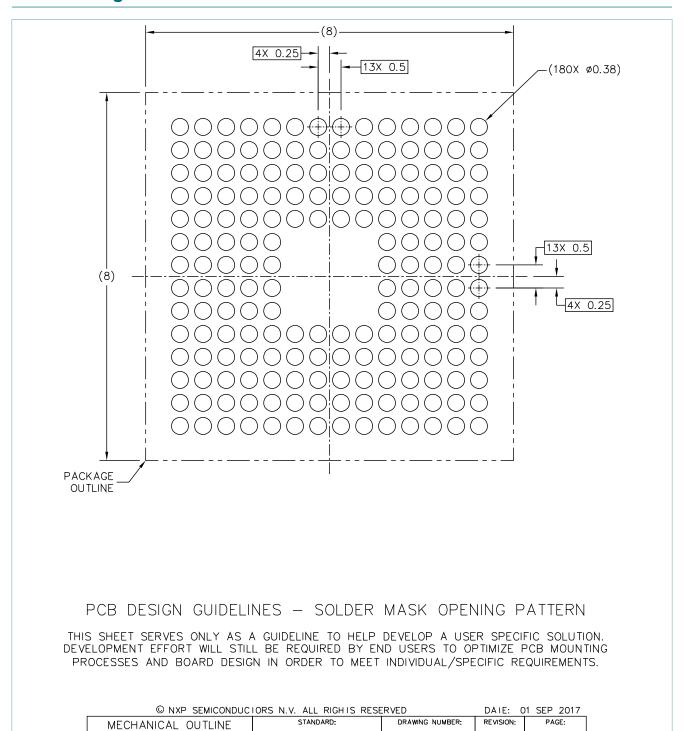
Reflow soldering footprint for VFBGA180 (SOT1945-1)
